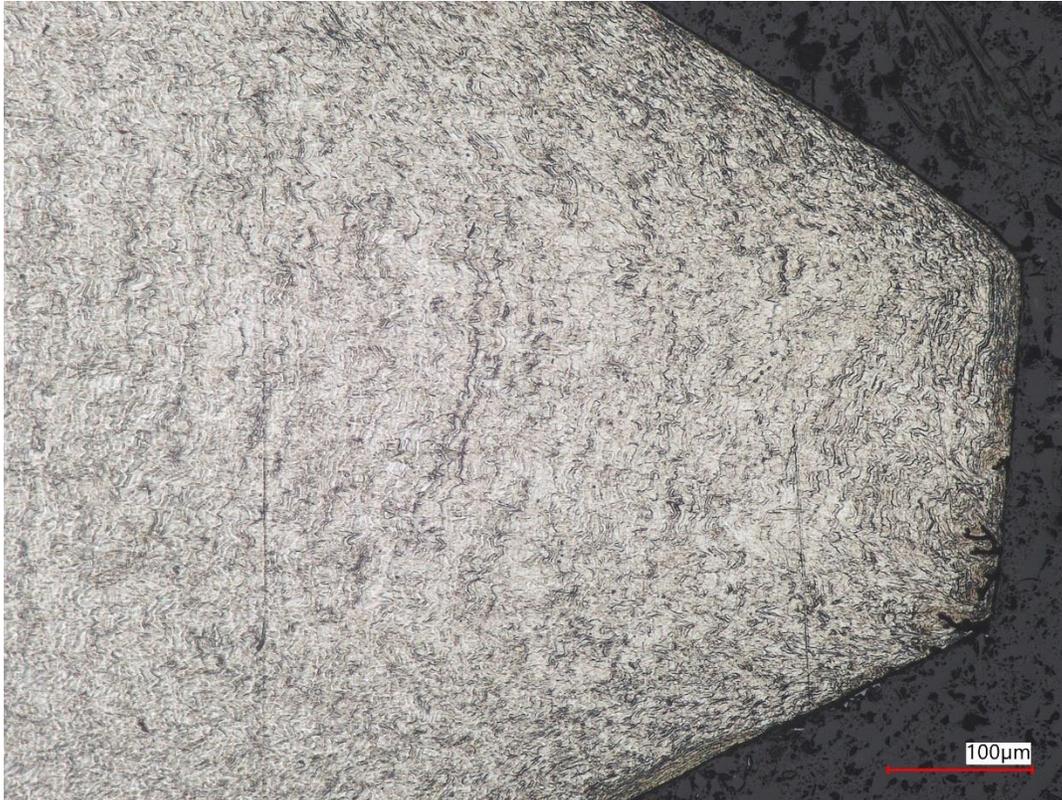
FOLDS OBSERVED AT THE CREST AND FLANK OF THREADS, BOLT R3
